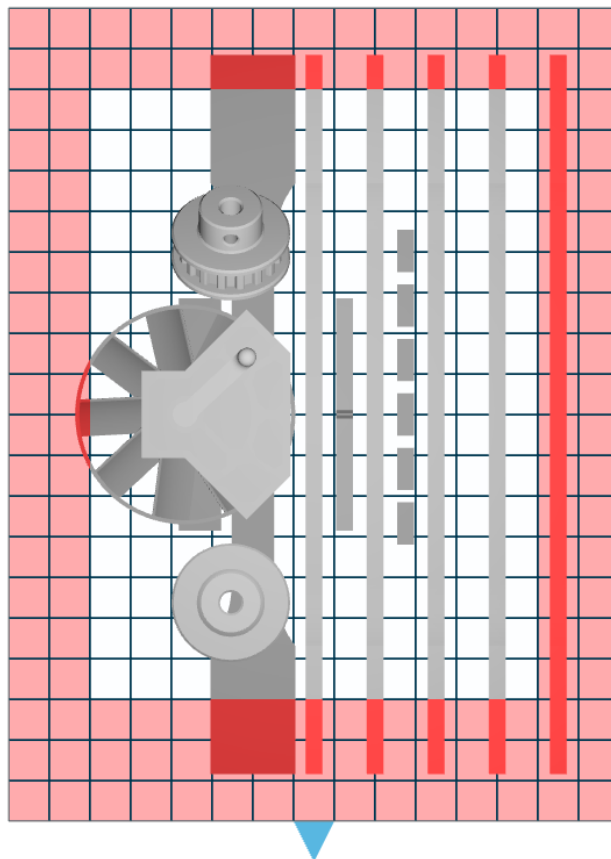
Top view of print layout of horizontal and horizontal-flat specimens manufacturing
